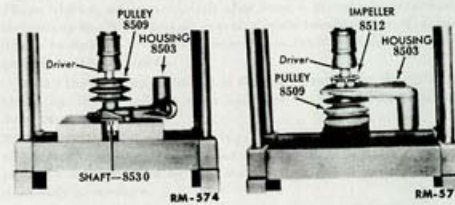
Pressing Pulley on Water Pump Shaft (Ball Bearing Type)
